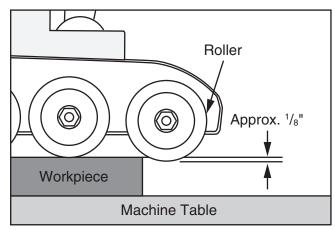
Rollers adjusted approximately 1/8" below workpiece.
